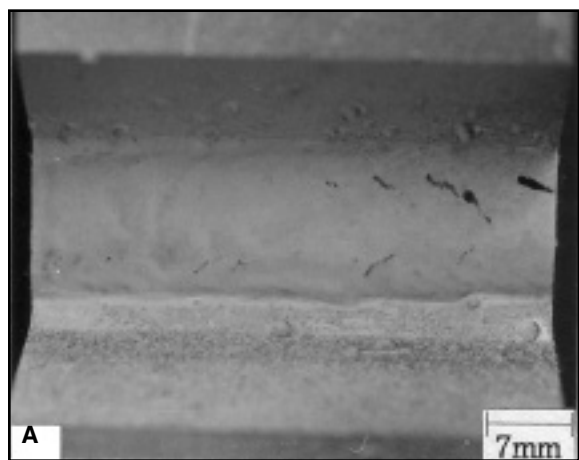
Various cracks in deposited weld metal welded with 103 ppm boron-content wire.
